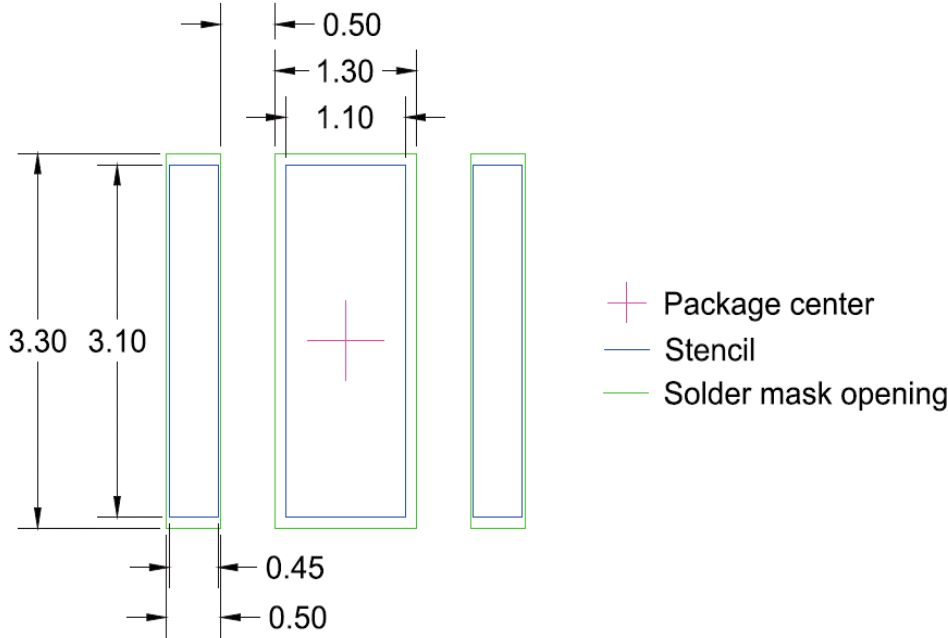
Recommended PCB solder pad layout for LUXEON SunPlus HPE.
